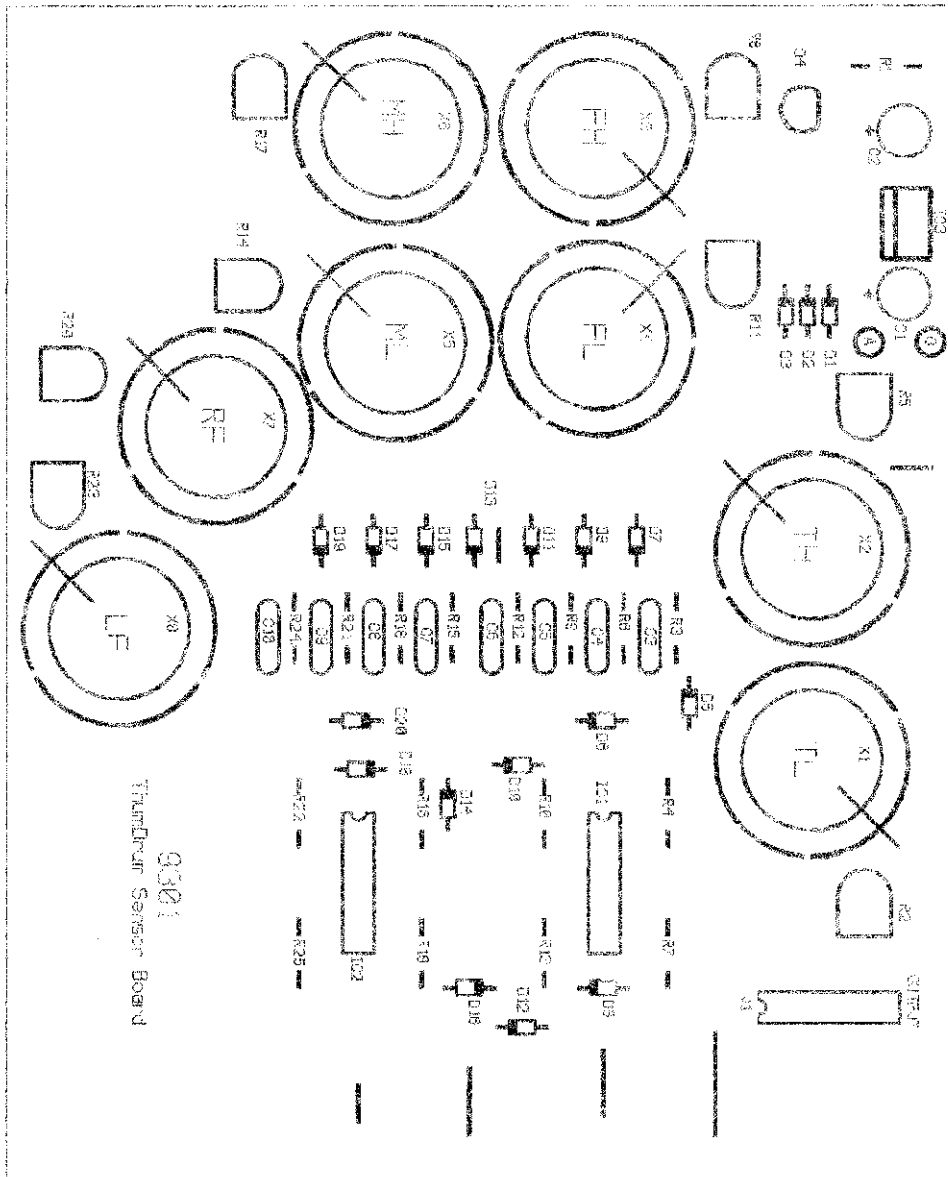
Most of the components mount on the legended side of the circuit board in the locations shown in this Parts Placement drawing. Piezo Disks, Trim Pots and the LED mount on the conductor side.
